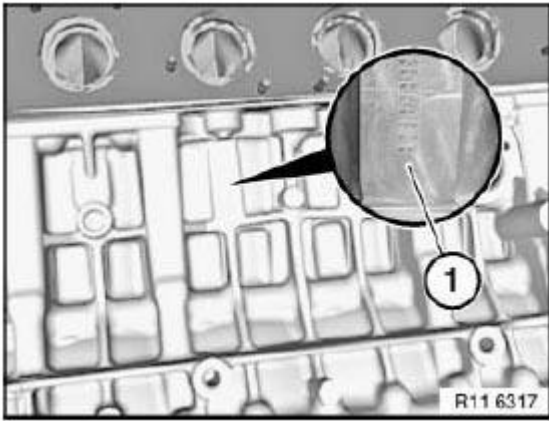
Identifying Bearing Classification Of Crankcase Upper Section
